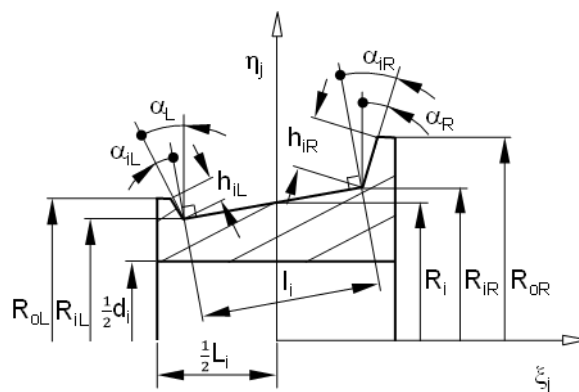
Detailed geometry of the flanges for tapered roller bearings inner raceway
